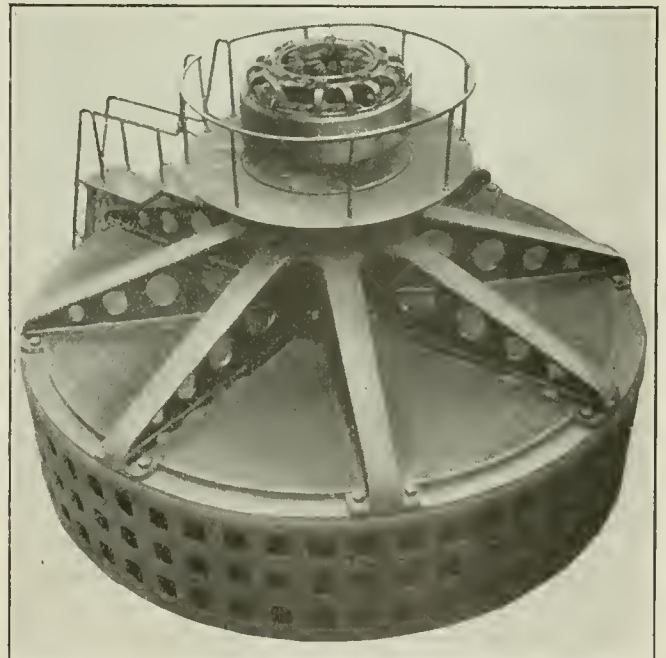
VERTICAL ALTERNATOR, SHOWING I-BEAM METHOD OF SUPPORTING THRUST BEARING
